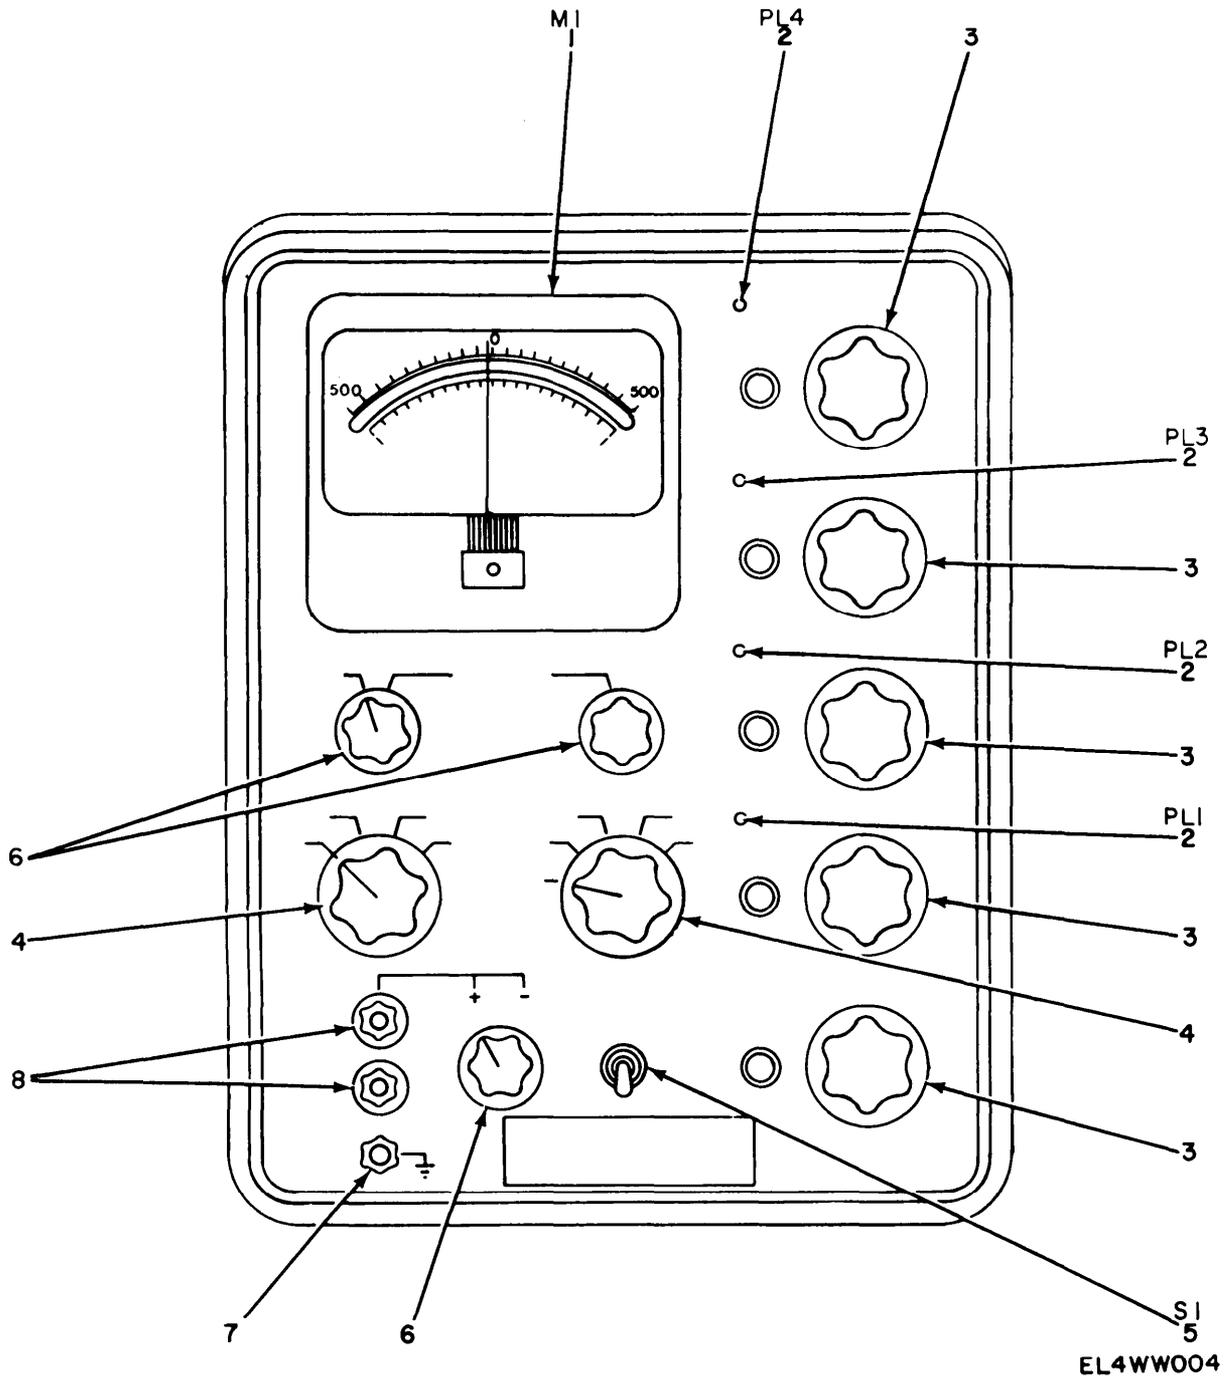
Voltmeter, Electronic, ME-161A/U, Panel Assembly, Front View.
